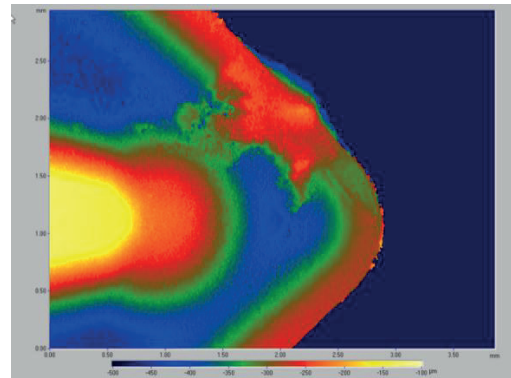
Cutting insert CNMG-120408-MP after machining
